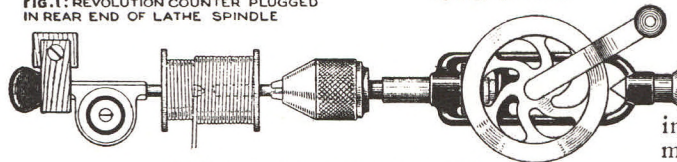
WINDING MANDREL ON HAND DRILL, BOTH DRILL AND COUNTER CLAMPED TO BENCH
